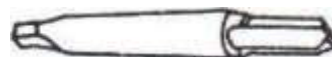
Two-lipped Taper Shank End Milling Cutter
